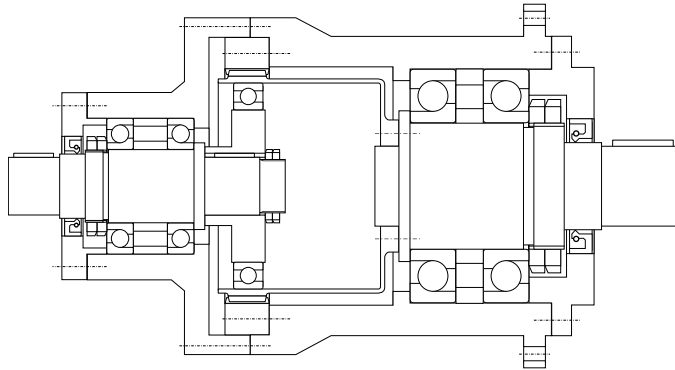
Schematic representation of a gearbox comprising multiple bearings
